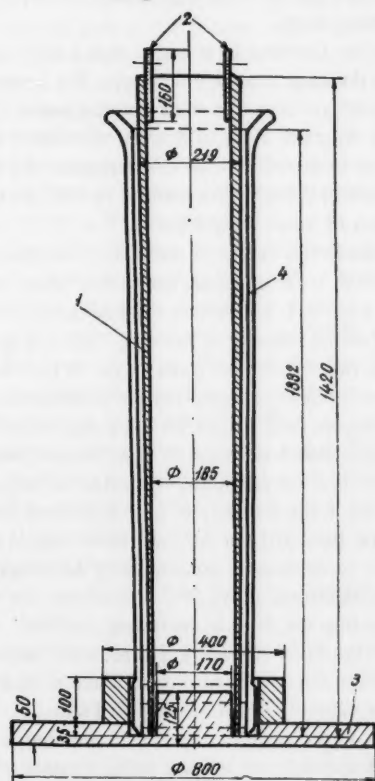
Setting the nozzle on the stand; 1) pipe; 2) "lugs" for drawing out pipe; 3) stand; 4) nozzle.
